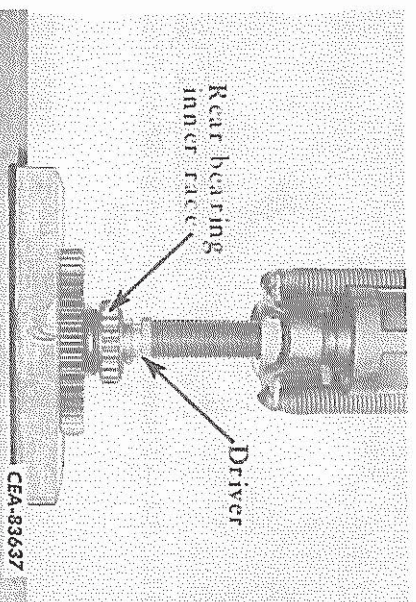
Removing the First Speed Driven Gear and Bearing Race
